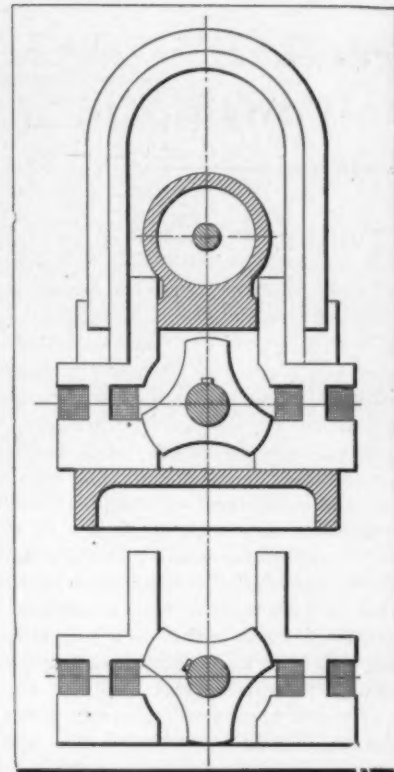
Cross-section of a rotor type of magneto with fixed coils embedded in the soft pole pieces, eliminating the use of wire on the moving parts
